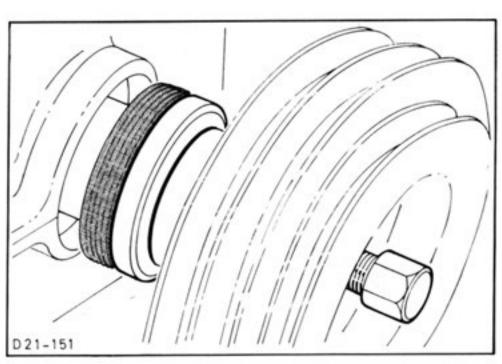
Centre timing cover by means of Special Tool 21-069 and crankshaft pulley.
